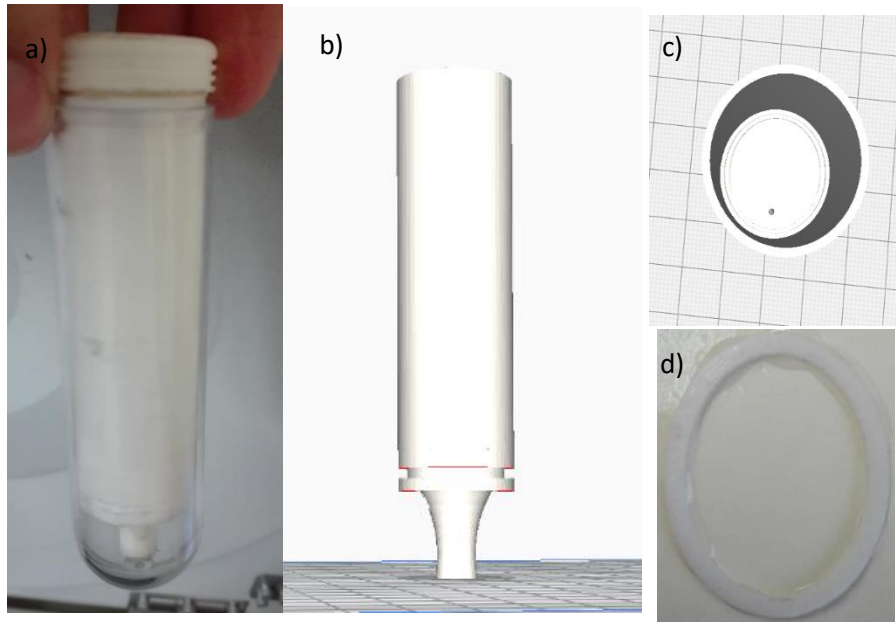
Several views of the full-tube device a) Side view of printed device; Cura view of the device in b) side view and c) top view; d) Membrane module to be fitted into tube
